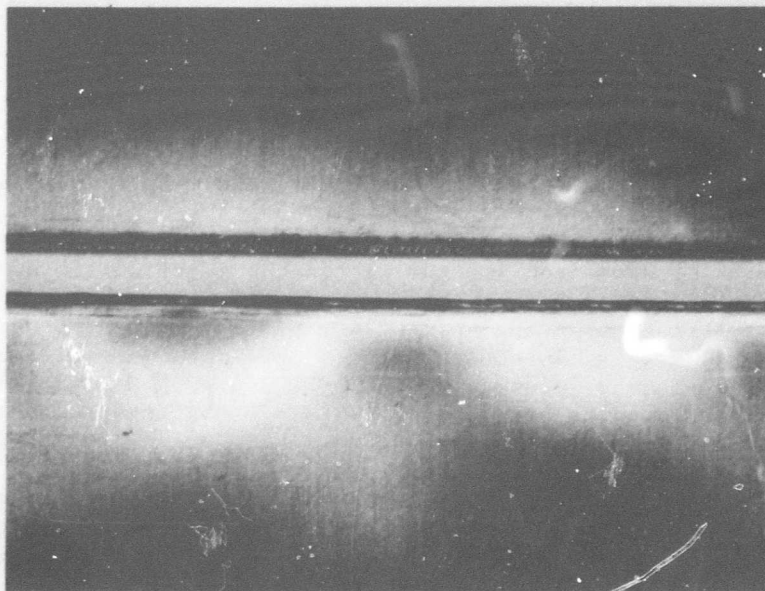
A COMPARISON OF BEAD APPEARANCE OF LASER (TOP) AND TIG (BOTTOM) WELDS IN TANTALUM SHEET. HIGHLIGHTED AREAS REPRESENT DISTORTION OF THE SHEET DURING WELDING.
